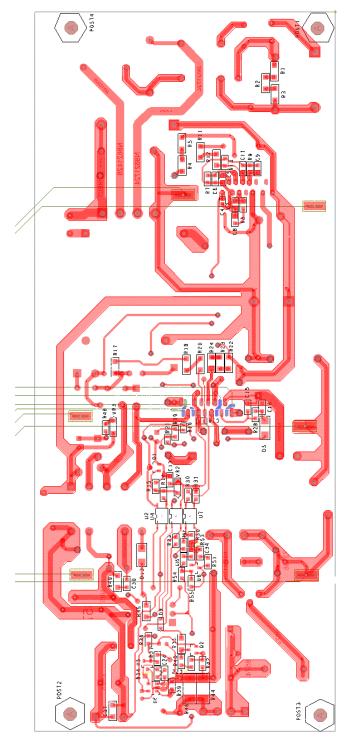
Printed Circuit Layout, Bottom Side Traces and Components.
